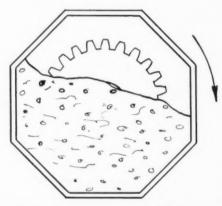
Figure III. Gears were among the first items to be processed with the technique of racking in a finishing barrel. This serves to do the "breaking in" which frequently necessitate hand filing. Large gears may be held on a central spindle as shown in the drawing. Smaller parts are held on other types of racks. The barrel shown in this drawing must be loaded and unloaded from one end and the direction of rolling should be reversed for half the total time to provide even wear on both sides of the gears.
